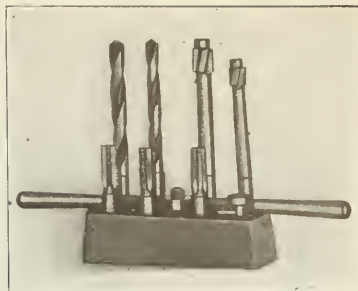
Block containing Set of Tools for Drilling, Counterboring and Tapping
